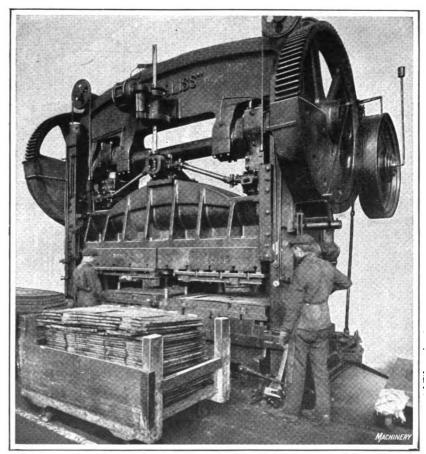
Large Single-action double-crank press used for blanking and flanging a part at one stroke.
